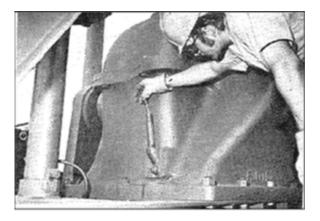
Worker inspecting the gearbox at the work site
